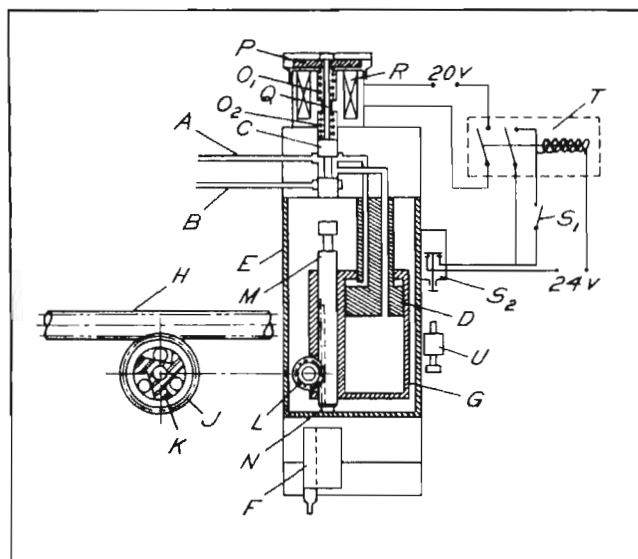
Mechanism for controlling the feed of a hydraulically operated overhead slide used on a copying lathe.
